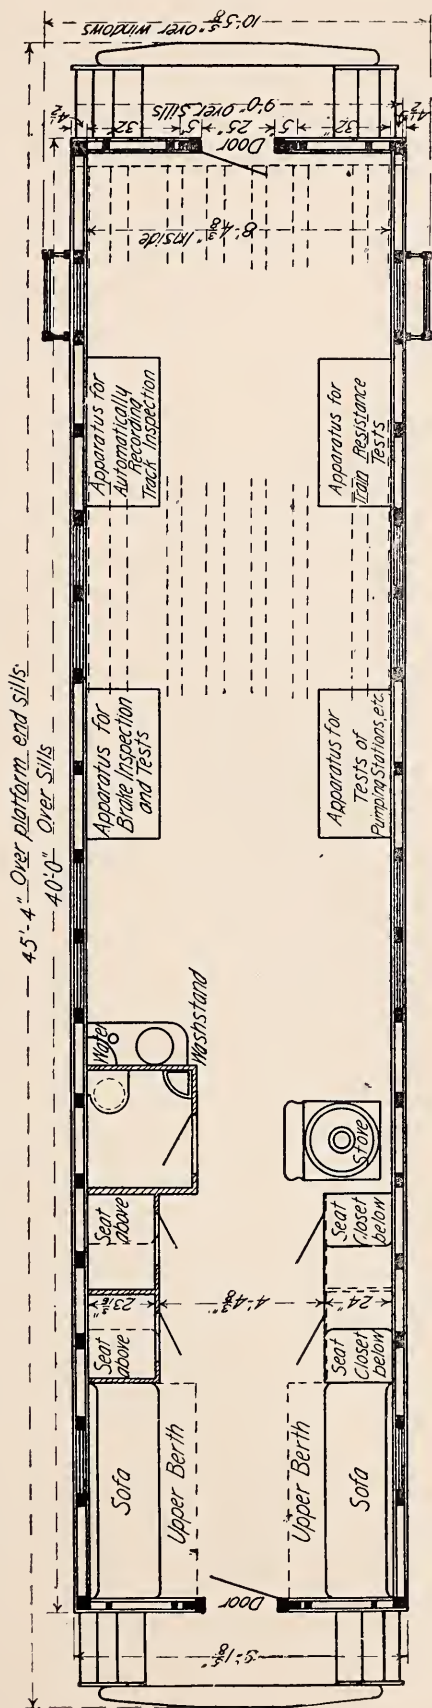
A NEW DYNAMOMETER CAR—FLOOR PLAN.
